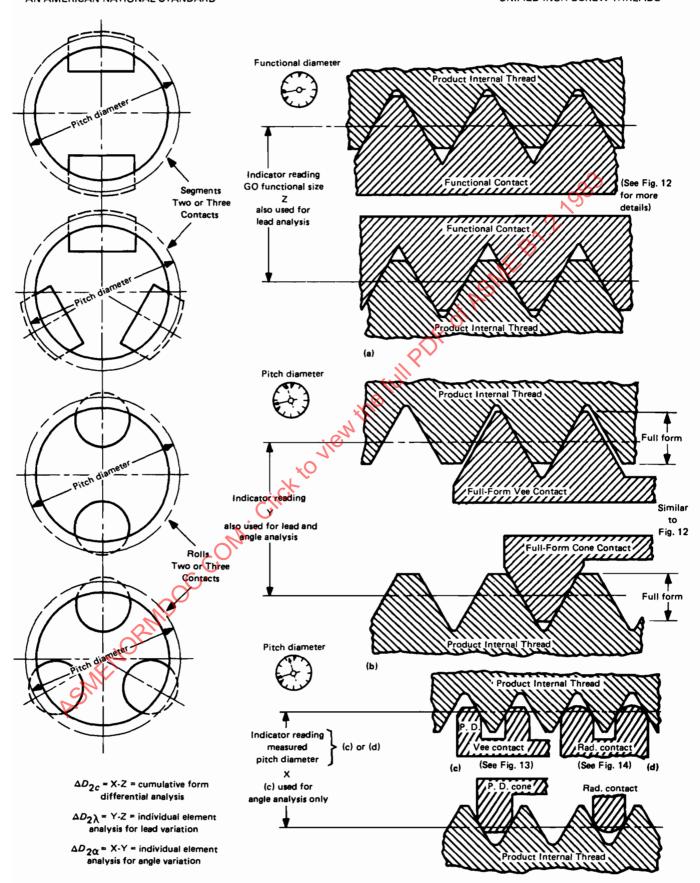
INDICATING THREAD GAGES — DIFFERENTIAL GAGING
